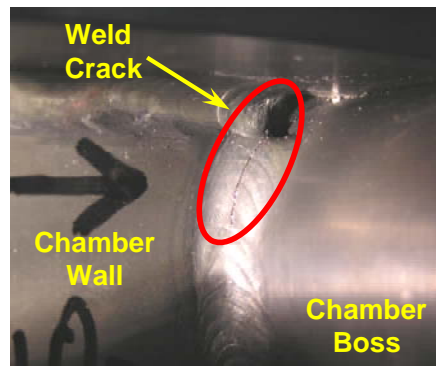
Photograph of test chamber boss positioning weld crack.
